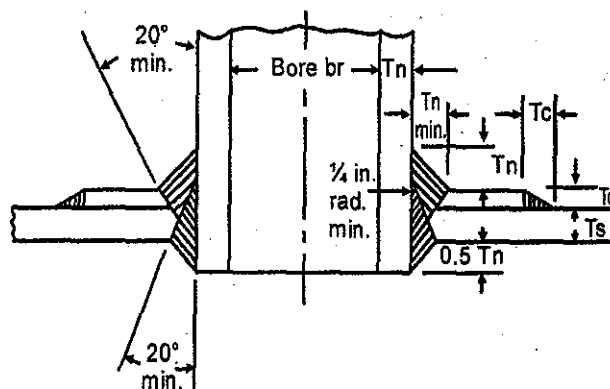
MINIMUM WELD ATTACHMENT FOR STANDPIPES OVER 5 IN. BORE REQUIRING COMPENSATING PLATES
